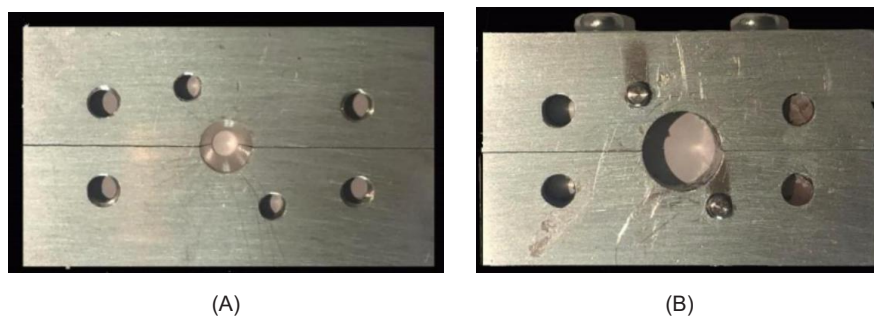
(A) Molding tool A for molding composite resin, (B) Molding tool B for tooth fixation
